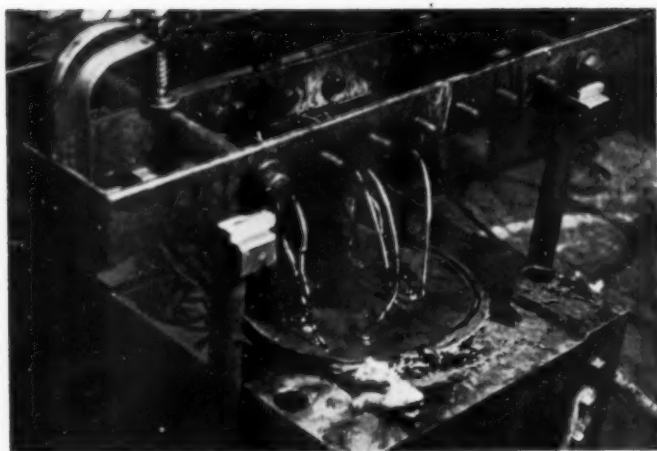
A large mold being plated outside of tank. The cavity of mold constitutes the tank.
